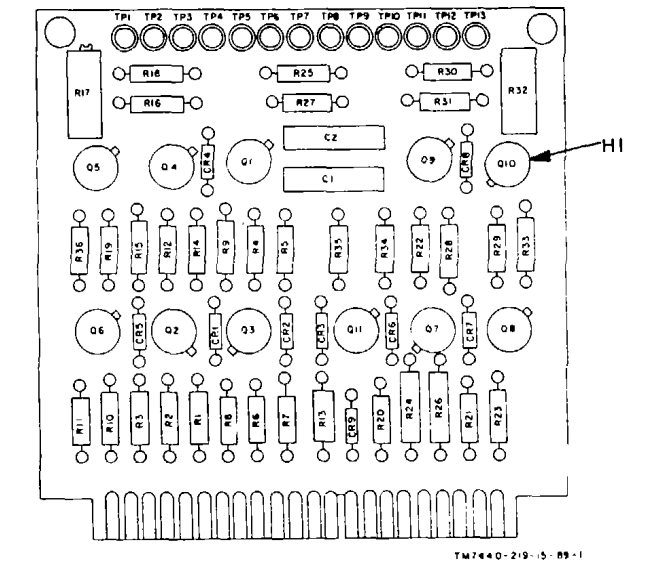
Component board assembly (±12 VDC) (PS1A2), component location diagram.
